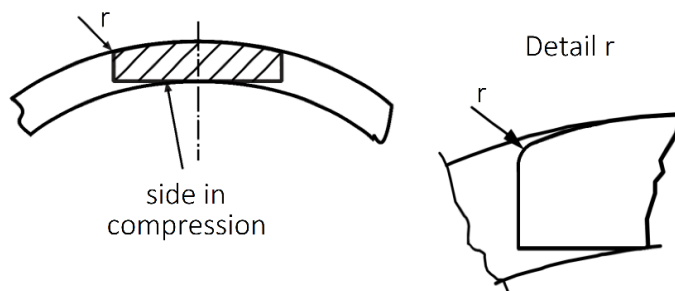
Cross section through bend test specimen taken from a pipe
